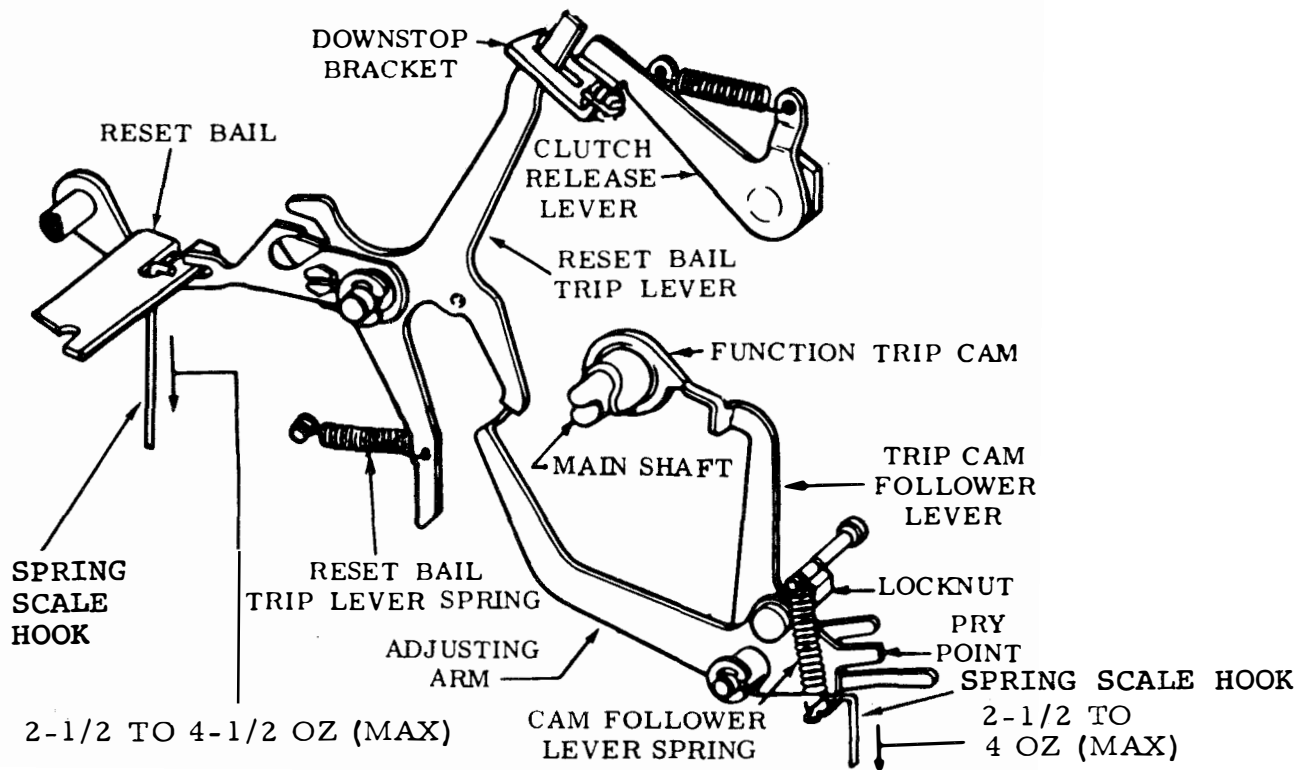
Cam Follower Lever Spring and Reset Bail Trip Lever Spring, Front View
